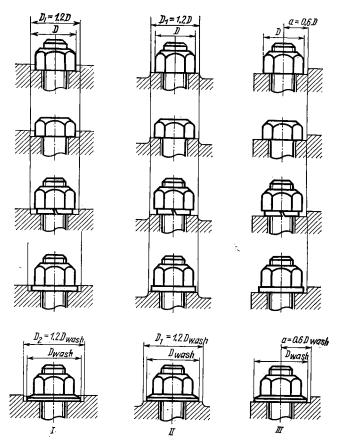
Dimensions of bearing surfaces under nuts and bolt heads
